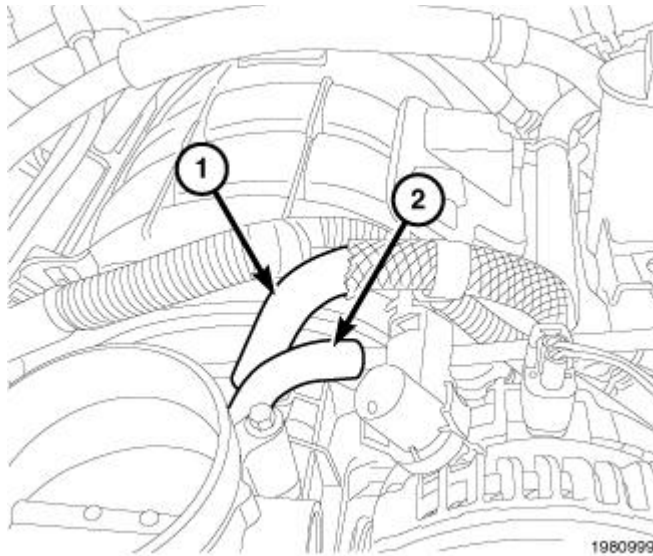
Brake Booster Hose & Vapor Purge Hose
